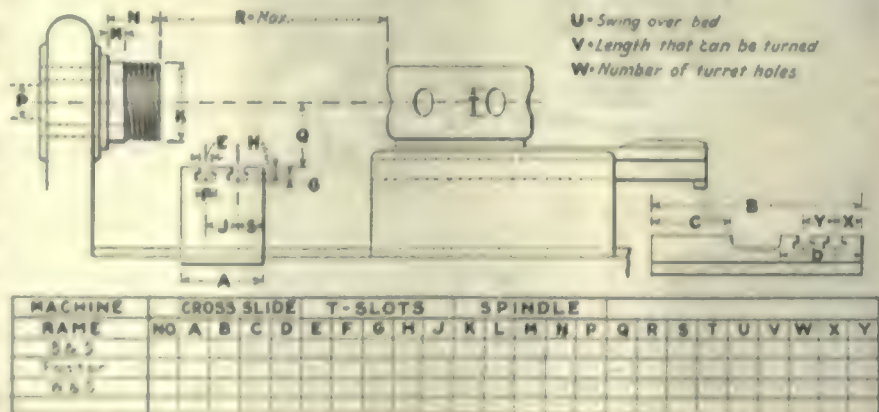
DIAGRAM FOR HAND SCREW MACHINE
